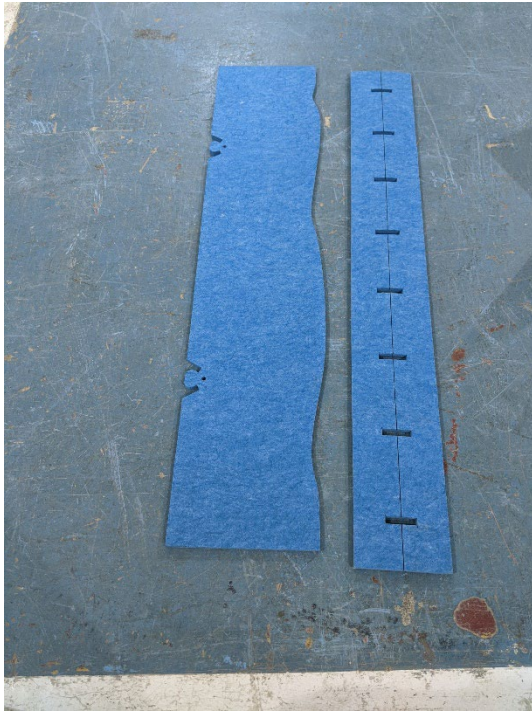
Specimen fin piece (left) and base piece (right) prior to assembly
